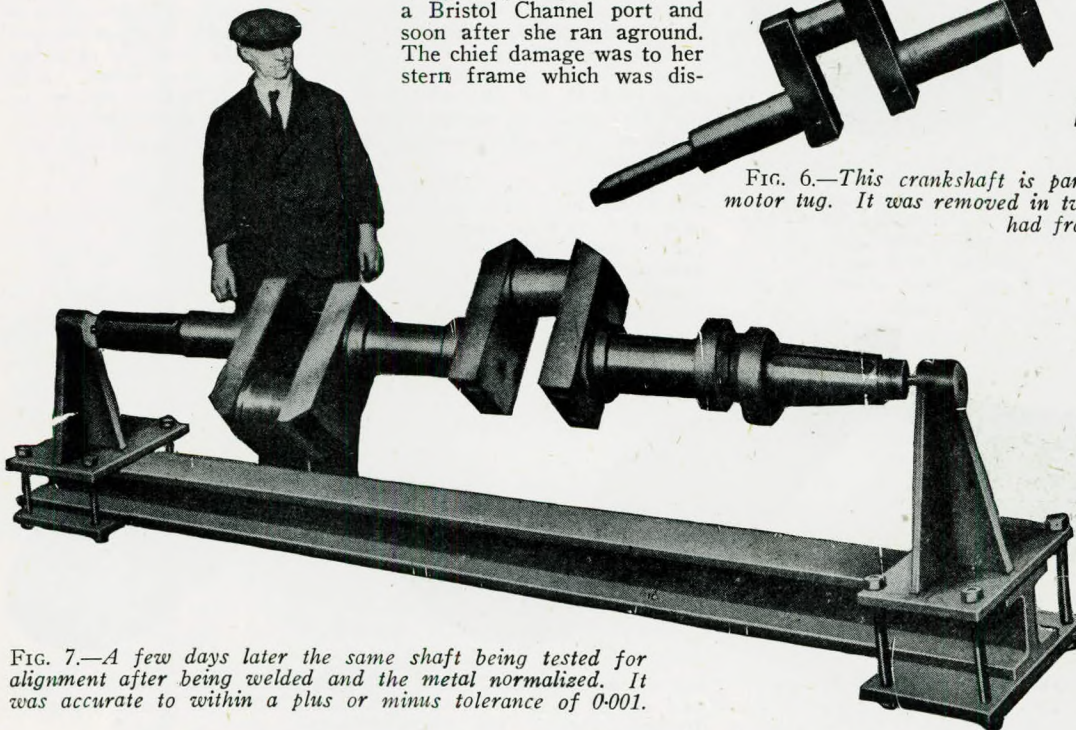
A few days later the same shaft being tested for alignment after being welded and the metal normalized. It was accurate to within a plus or minus tolerance of 0.001.
